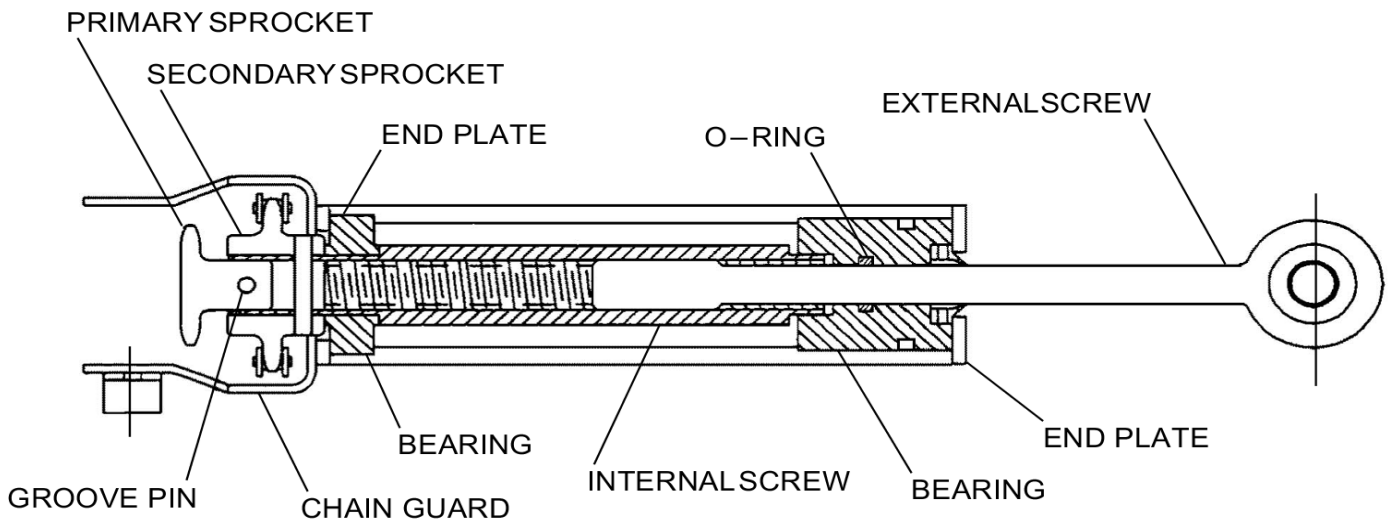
Sheet 8 : Aileron Trim Tab Actuator Disassembly/Assembly
